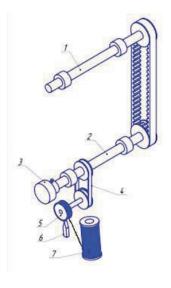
Automatic filling device of the shuttle pulley proposed scheme 1-st main shaft, 2-nd shuttle shaft, 3-rd shuttle, 4-th belt drive, 5-th shuttle spool (spool), 6-th spool sensing button, 7-th spool spool.
